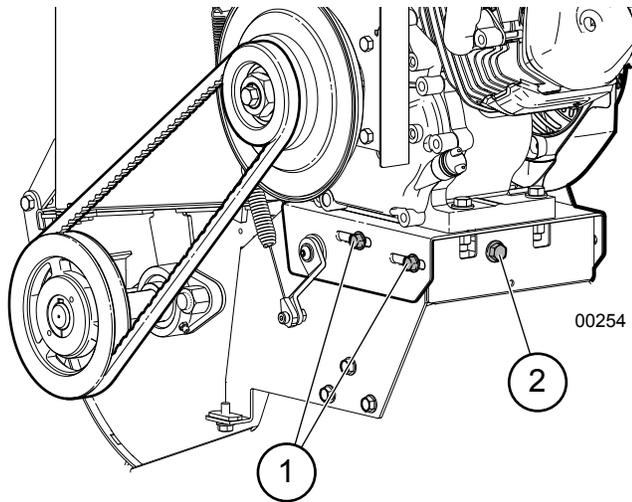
BXMC3409 Drive Belt – Honda GX270
